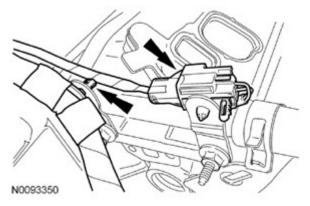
Locating Oil Fill Tube Clamp Courtesy of FORD MOTOR CO.
